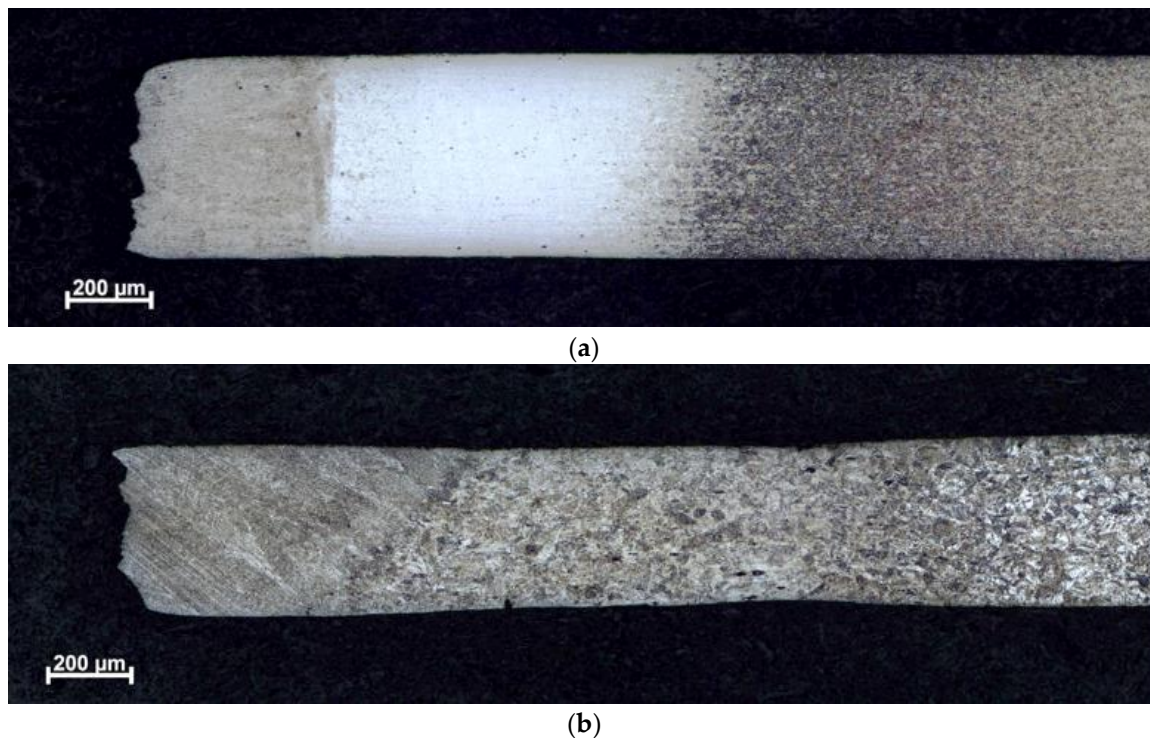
Microstructure on longitudinal sections through miniature tensile test specimens from weld 18 (the fracture is on the left): (a) Specimen of the top sheet T15-81c; and, (b) Specimen of the bottom sheet T15-82a.
